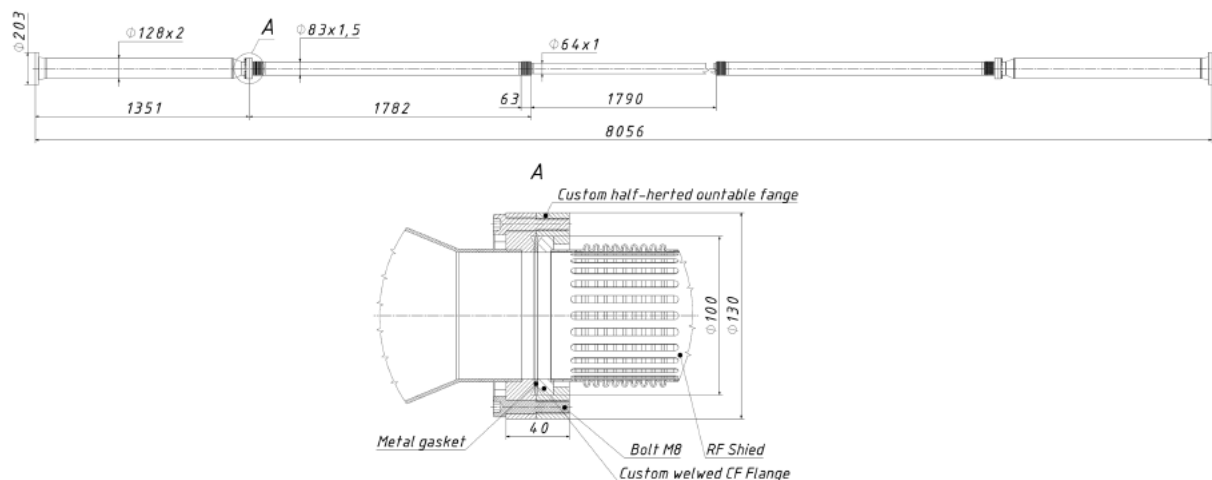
Part of the accelerator vacuum beam pipe that will pass through the SPD experimental setup. At the first stage of the experiment, the central segment of the pipe will be made of aluminum. Later it will be replaced with a beryllium segment. All dimensions are given in millimeters.
